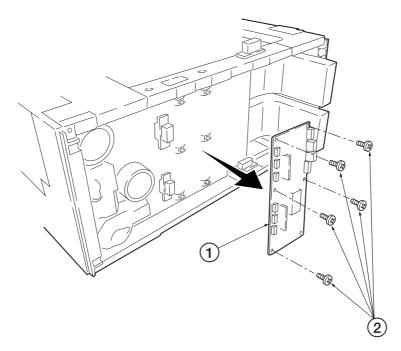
Removing the main board (500-sheet cassette paper feeder)
